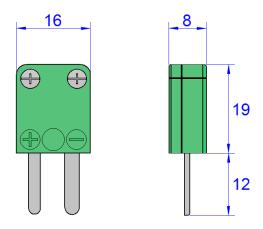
Figure: mini thermocouple plug (dimensions only as guide values)
